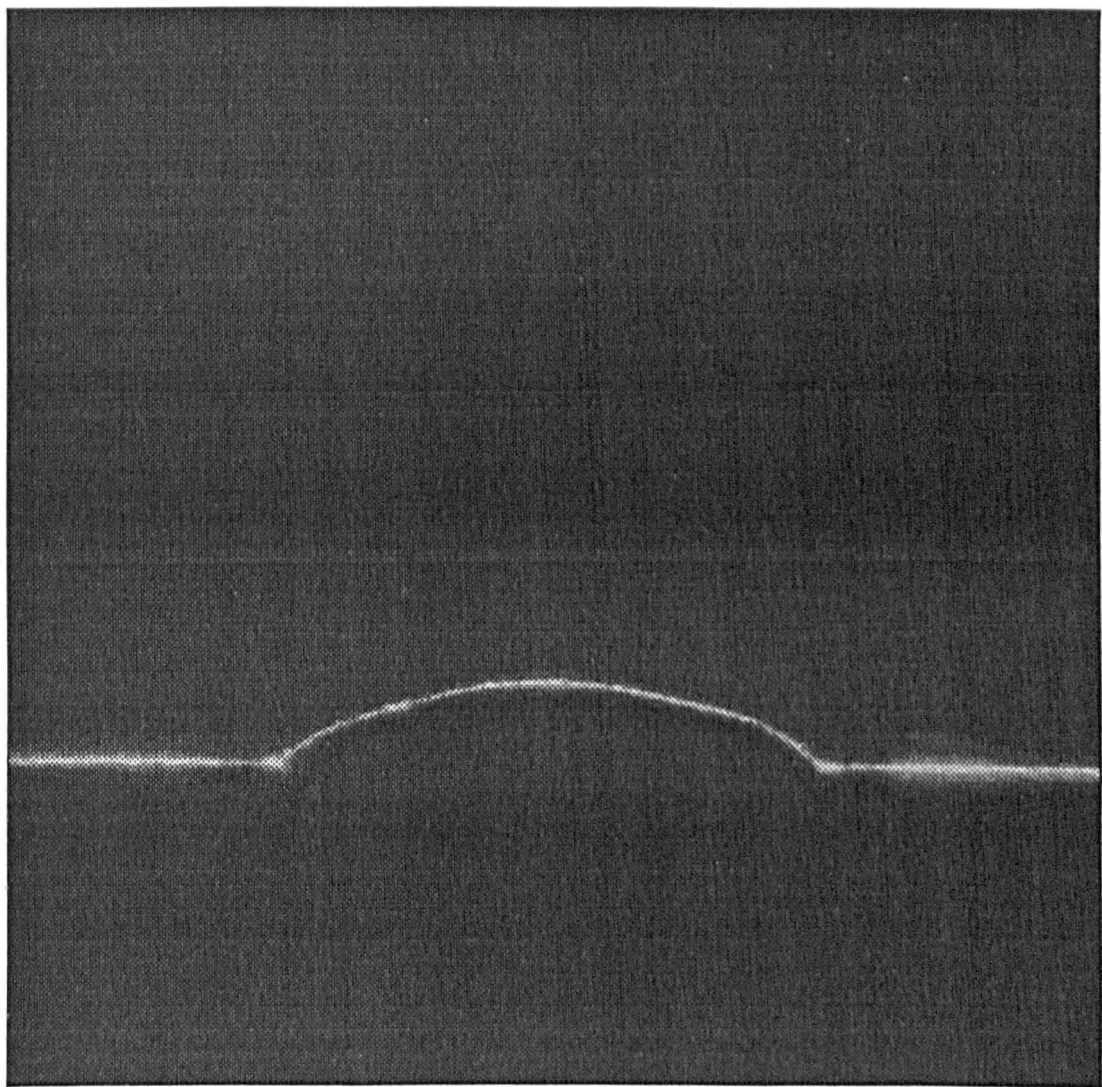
A butt weld seam with laser stripe viewed with an optical band pass filter fitted to camera lens
